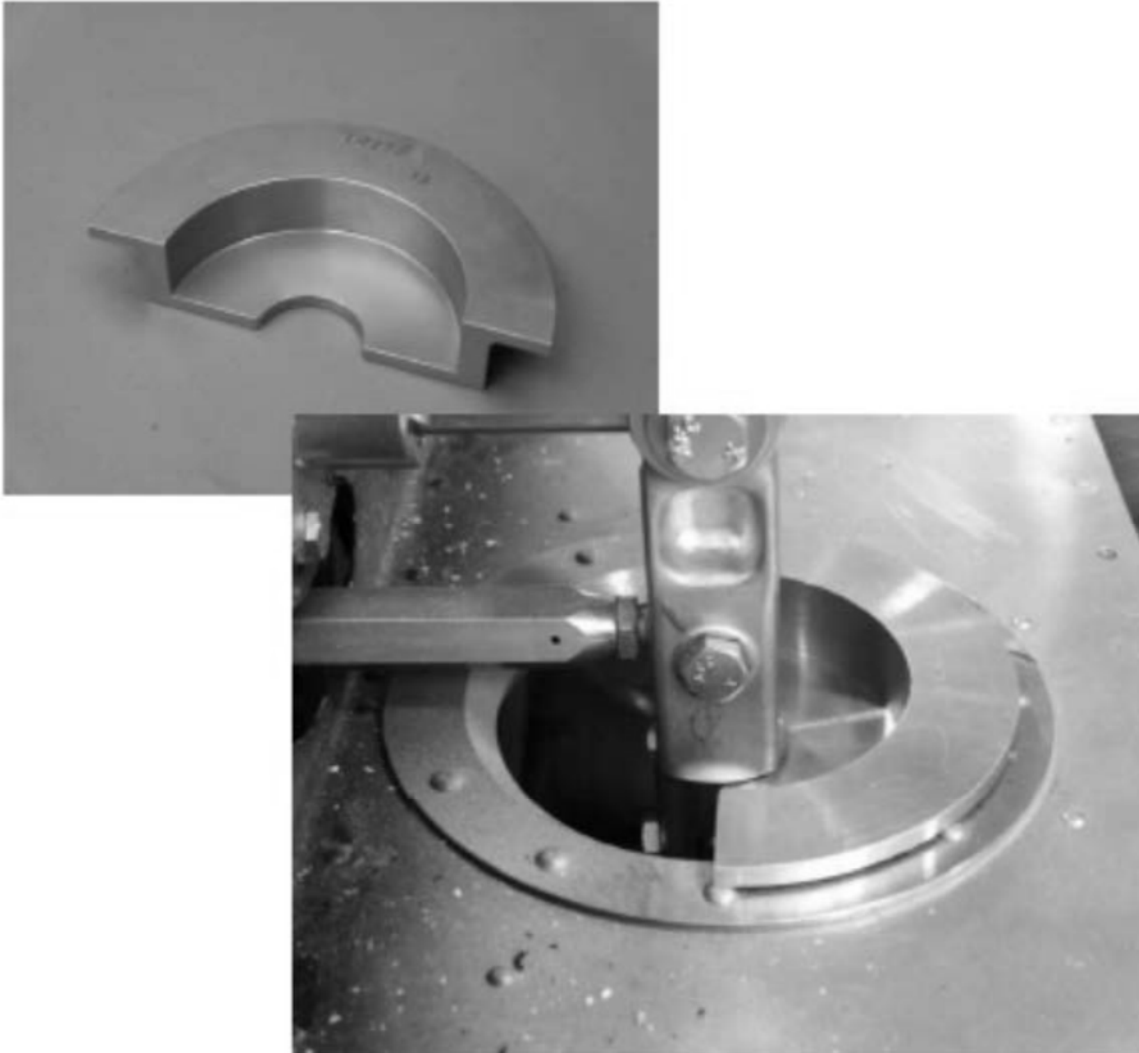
Cyclic Stick Rigging, Tool T-1775 Installed
